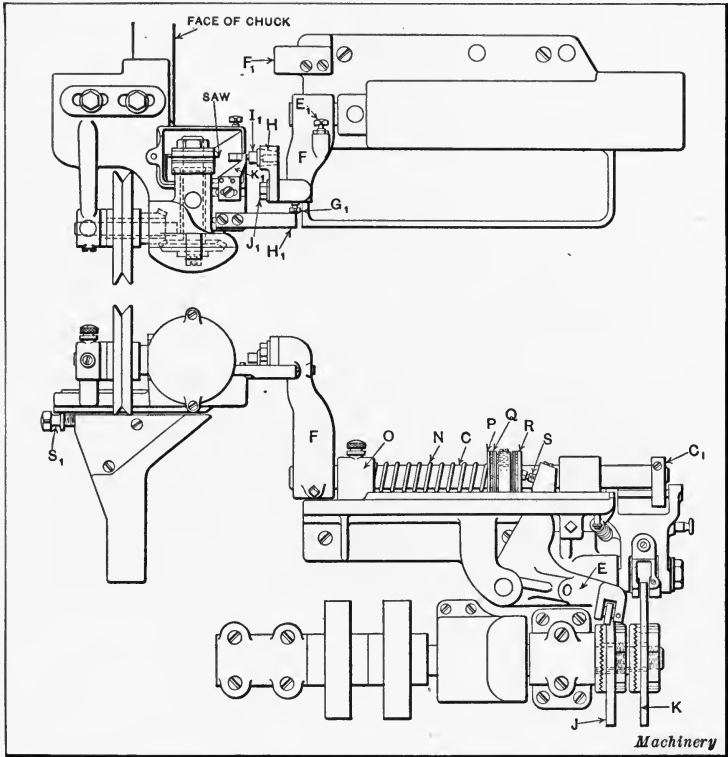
Front Elevation and Plan of Screw-slottting Attachment for Brown & Sharpe Screw Machine
